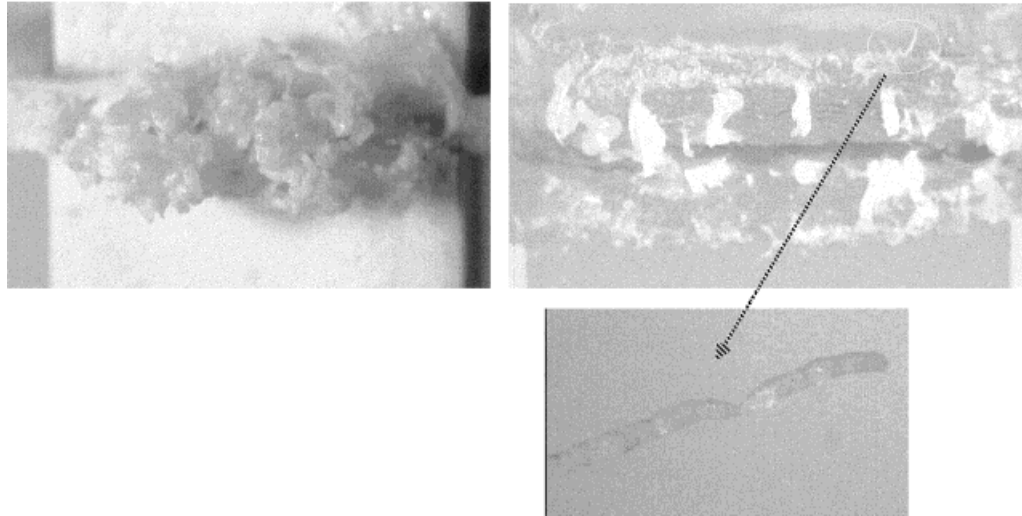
A weld extrudate picture showing macrofibrils. Welding conditions: frequency, 66 Hz; amplitude, 1.9 mm; 300 cycles.
